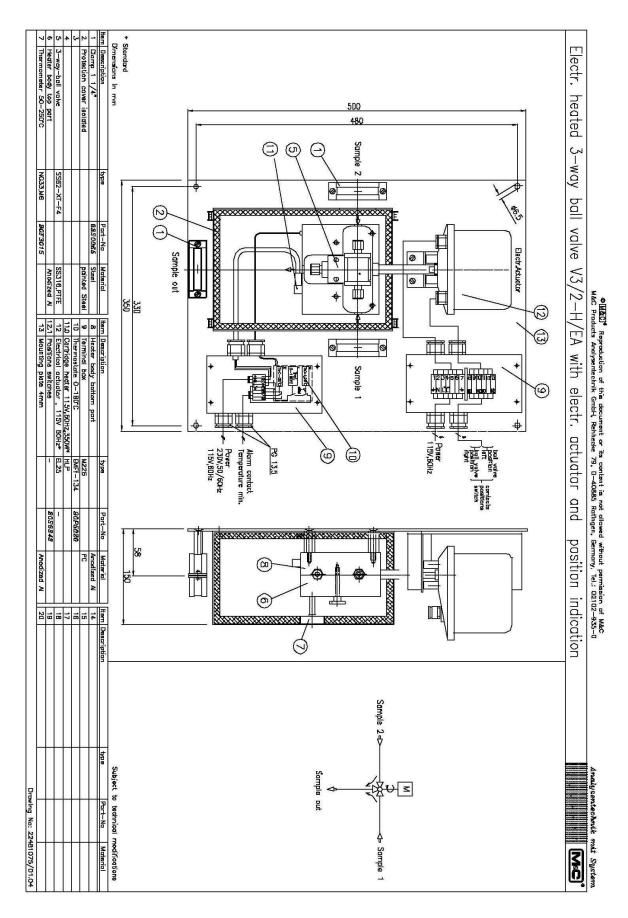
Electrically heated 3-way ball valve V3/2-H/EA with electrical actuator and position indication
